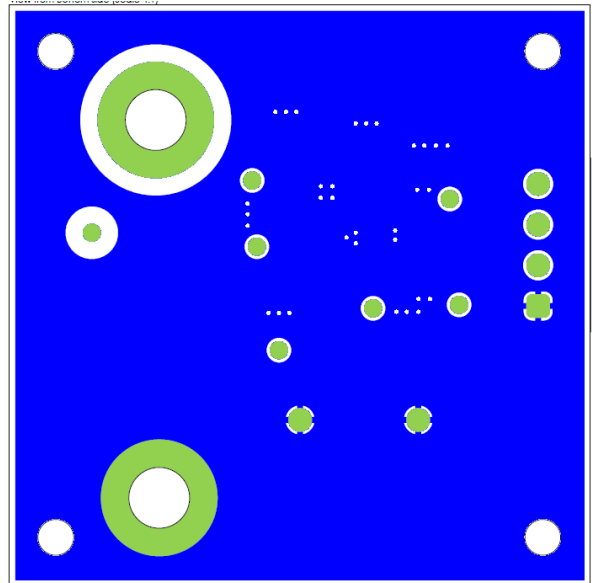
FAD1110EVB PCB Bottom Composite Drawing (bottom view)
